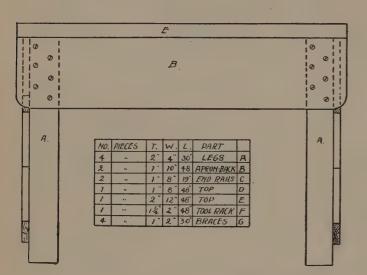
shows this bench in a working drawing. The heavy working top of the bench is made of a piece of 2 by 12-inch planed hard pine, 48 inches
